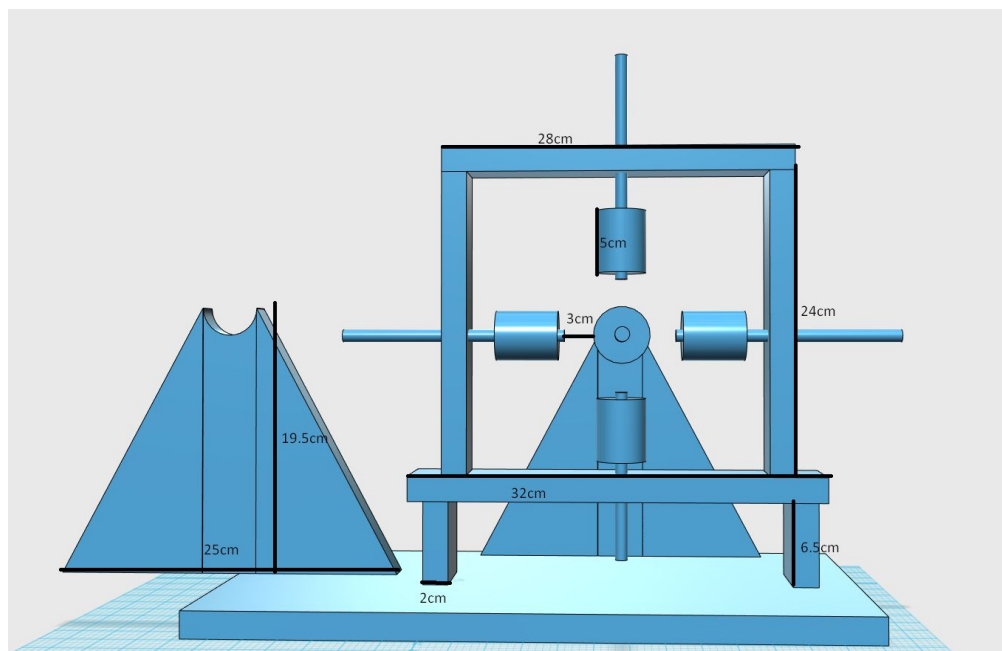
A side-view of our motor. Note: the electromagnet stand is not fastened to the base; this enabled us to adjust positioning more easily. Since our electromagnets were coiled on bolts, we can easily screw them in or out of the stand (thereby adjusting them closer or farther to the
